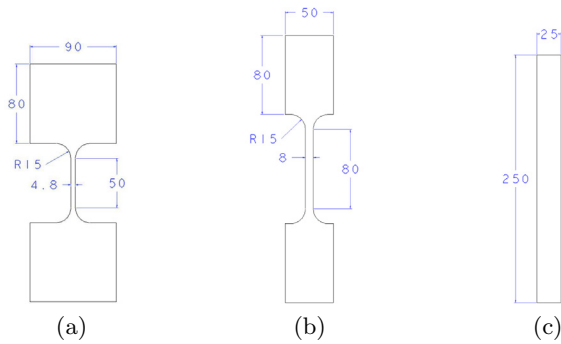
Geometries of the tensile specimens for: (a) Unidirectional composites; (b) Dyneema®SK75 mBRPC; (c) Kevlar®49 mBRPC. All dimensions in mm.
